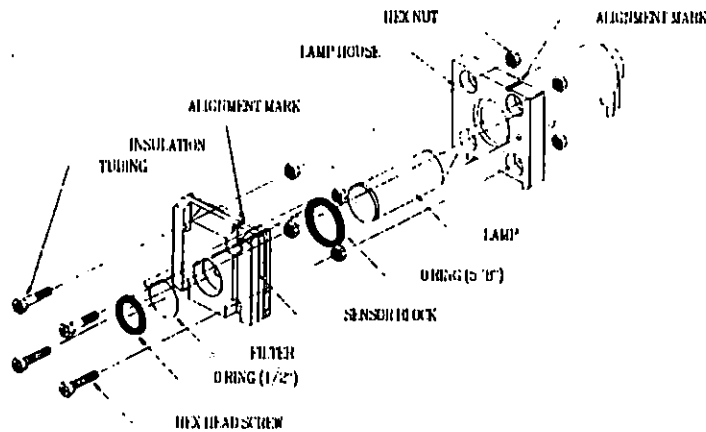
Disassembly and Assembly of Sensor Module of Professional PID Unit
